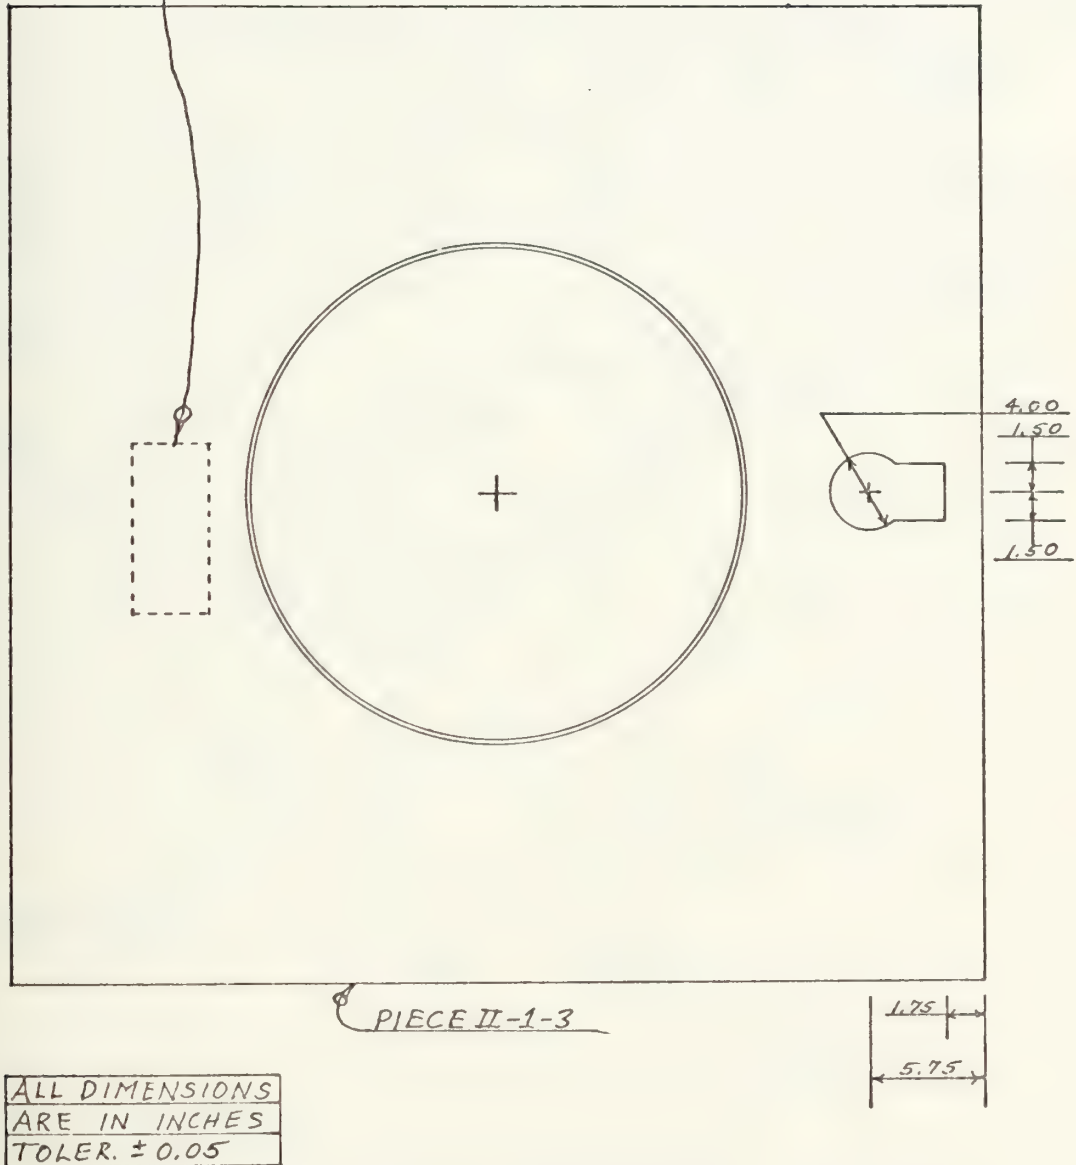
CUT REQUIRED IN PIECE II-1-3 FOR CORE REMOVAL
